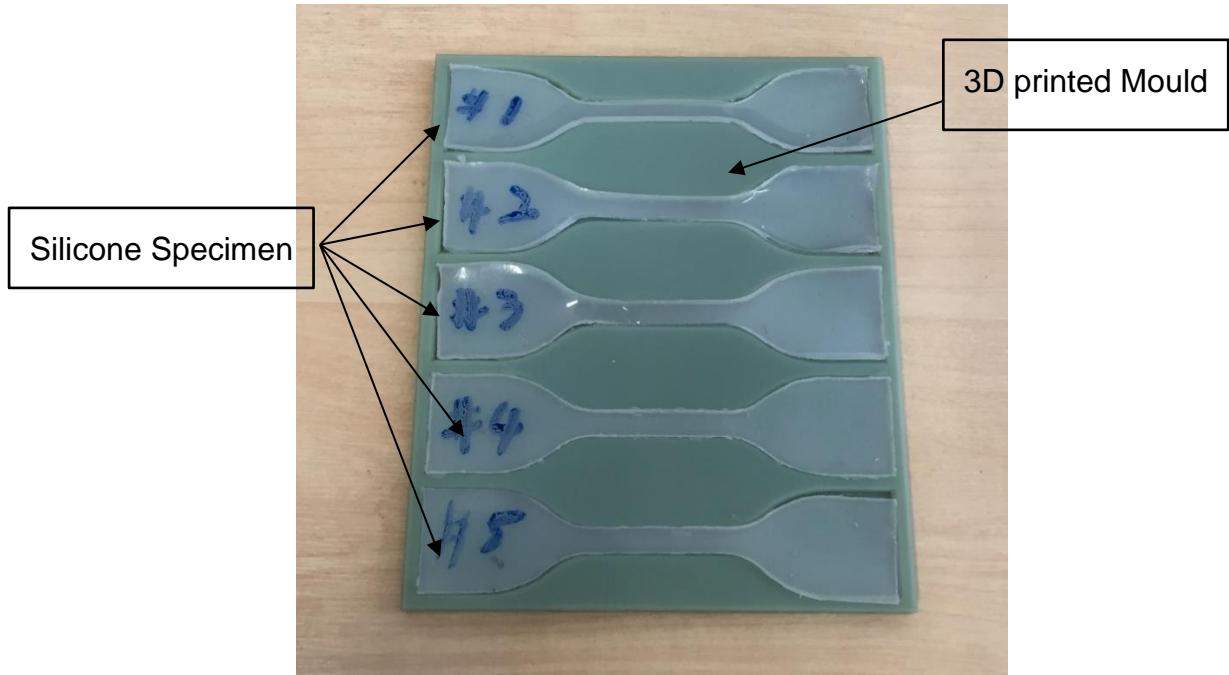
The prototype of the mould used for the fabrication of the silicone rubber and five specimens after curing.
